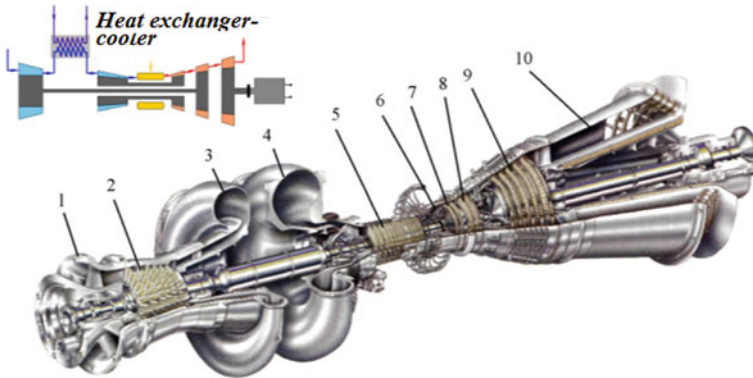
100 MW LMS100 engine from “General Electric Co.”: 1—inlet casing; 2—6-stage LPC; 3—air duct to cooler; 4—air duct from cooler; 5—14-stage HPC; 6—combustion chamber; 7—2-stage HPT; 8—2-stage LPT; 9—5-stage power turbine; 10—gas exhaust
